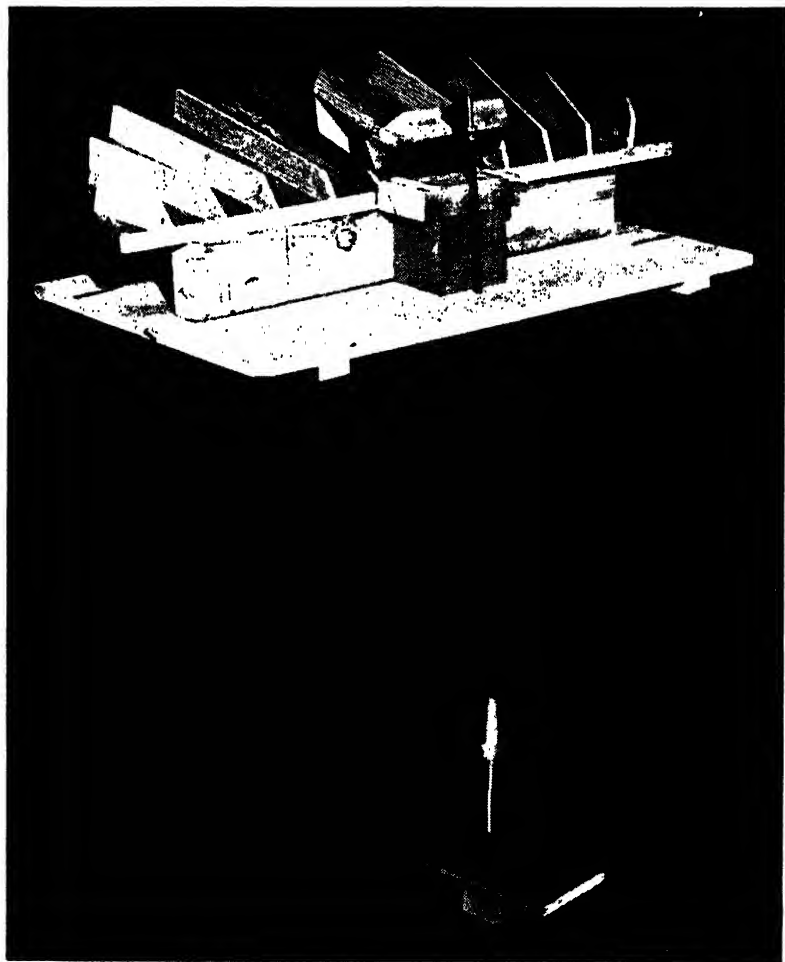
Bench layout which permits the hands to work in one horizontal plane. (Designed and constructed by Miss Jude Christopher and Mrs. Joy Cochran.)
